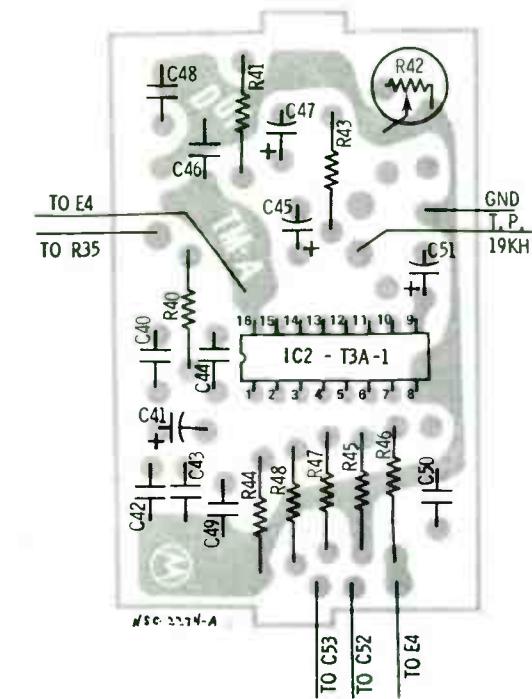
FM IF PLATED BOARD DIAGRAM (BOTTOM VIEW - WIRING SIDE)
